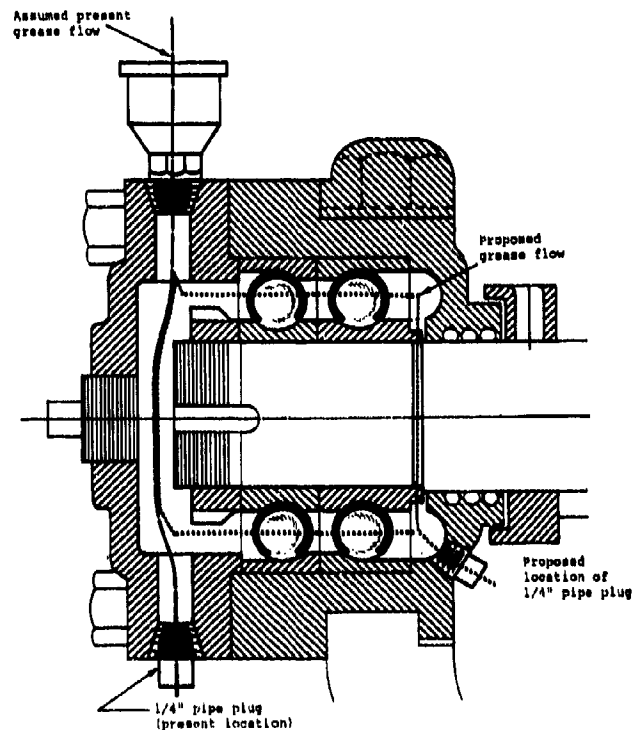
TYPICAL FIREPUMP BEARING AND HOUSING
